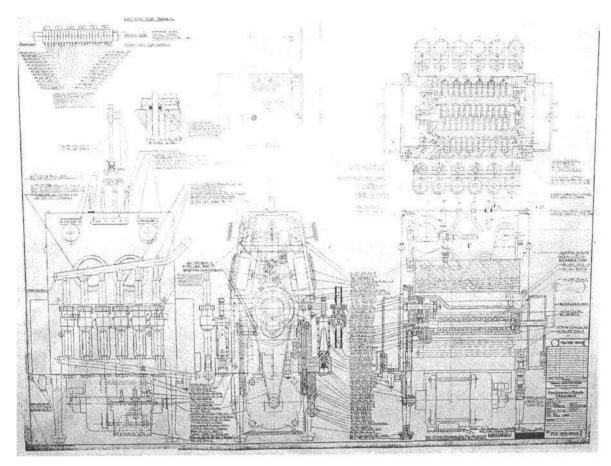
Blueprints for the Dodrill-GMR (General Motors Research) mechanical heart, Model 47-6-1. These drawings were completed September 10, 1954.
